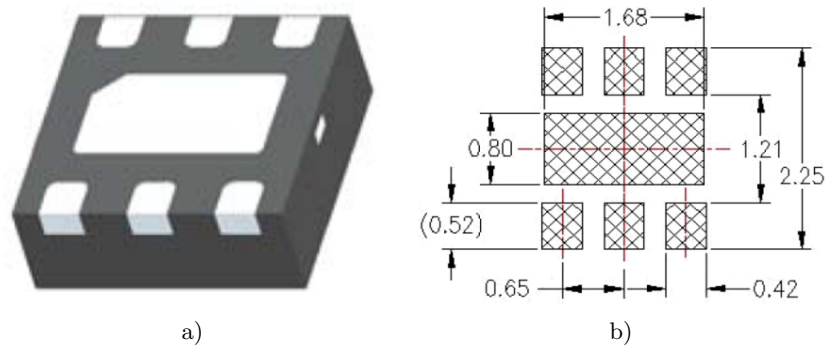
MLP package: (a) bottom view; (b) corresponding footprint. All dimensions in [mm].
